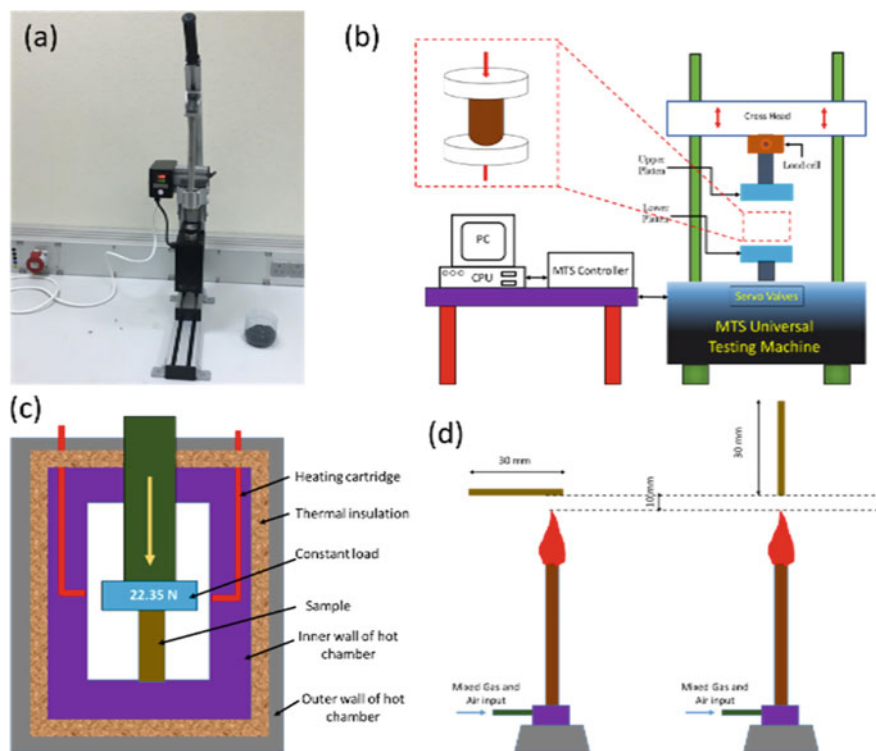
a Photograph of used hand-operated plastic injection molding machine; b Schematic of compression test conducted in a MTS universal testing machine; c Schematic of mechanical degradation test; d Schematic of Flammability test
